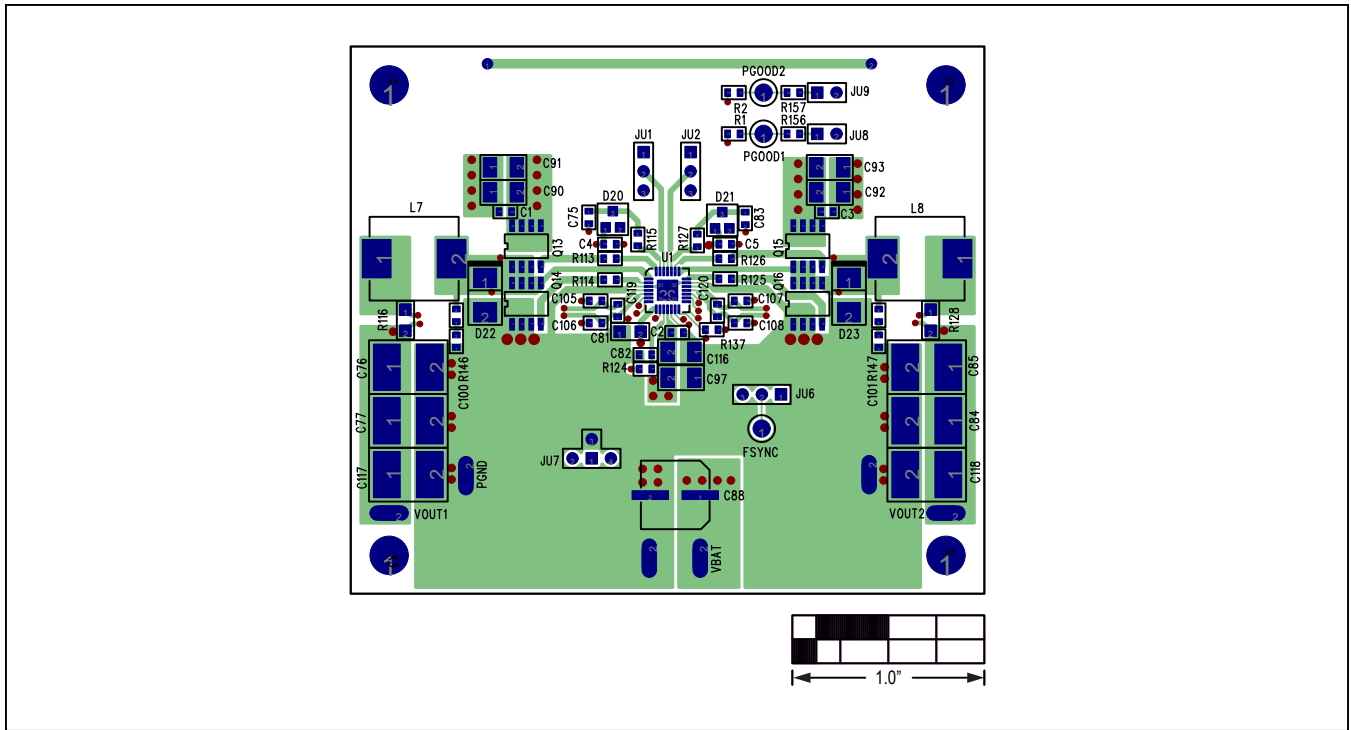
MAX16932 EV Kit Component Placement Guide—Component Side
